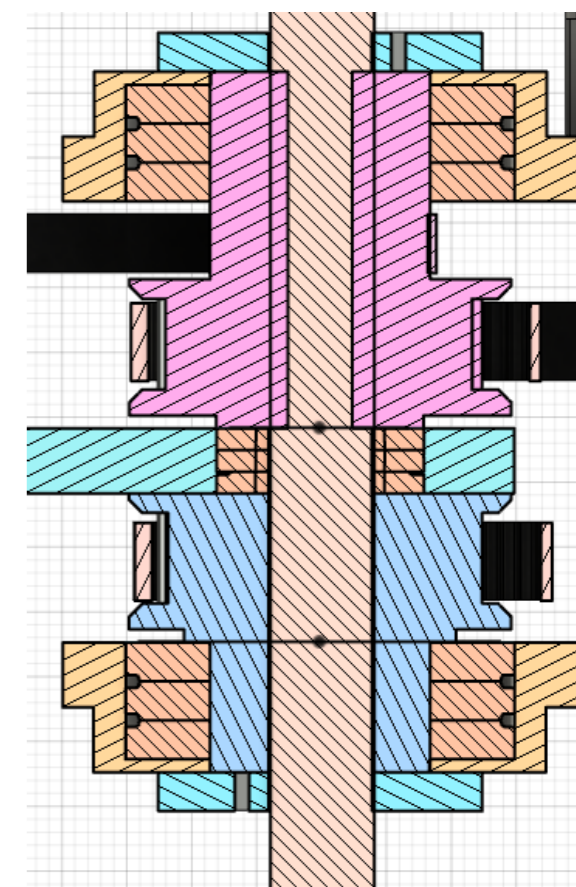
Dissected view of shoulder joint where the pink pulley is free rotating.
